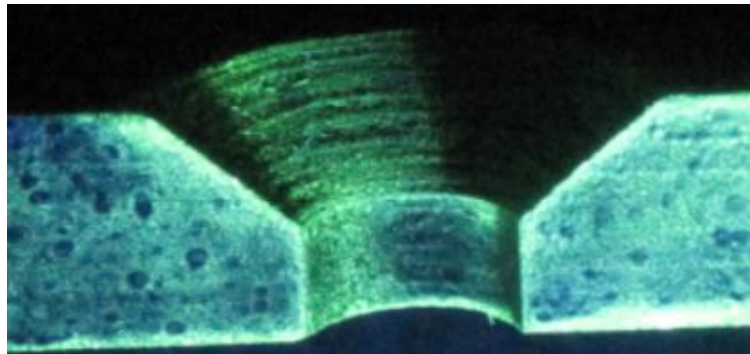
Optical microscopy of countersunk hole with slow feed rate. The tool overheats due to friction causing gouches from matrix burn-out.
